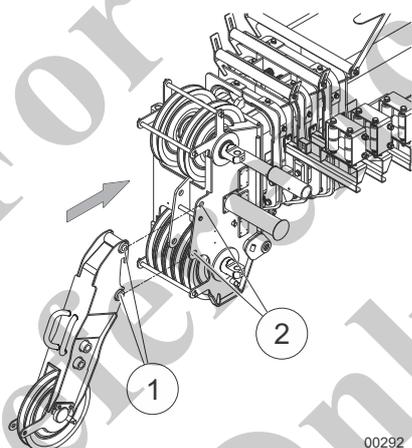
Lifting the auxiliary jib to the telescopic boom
